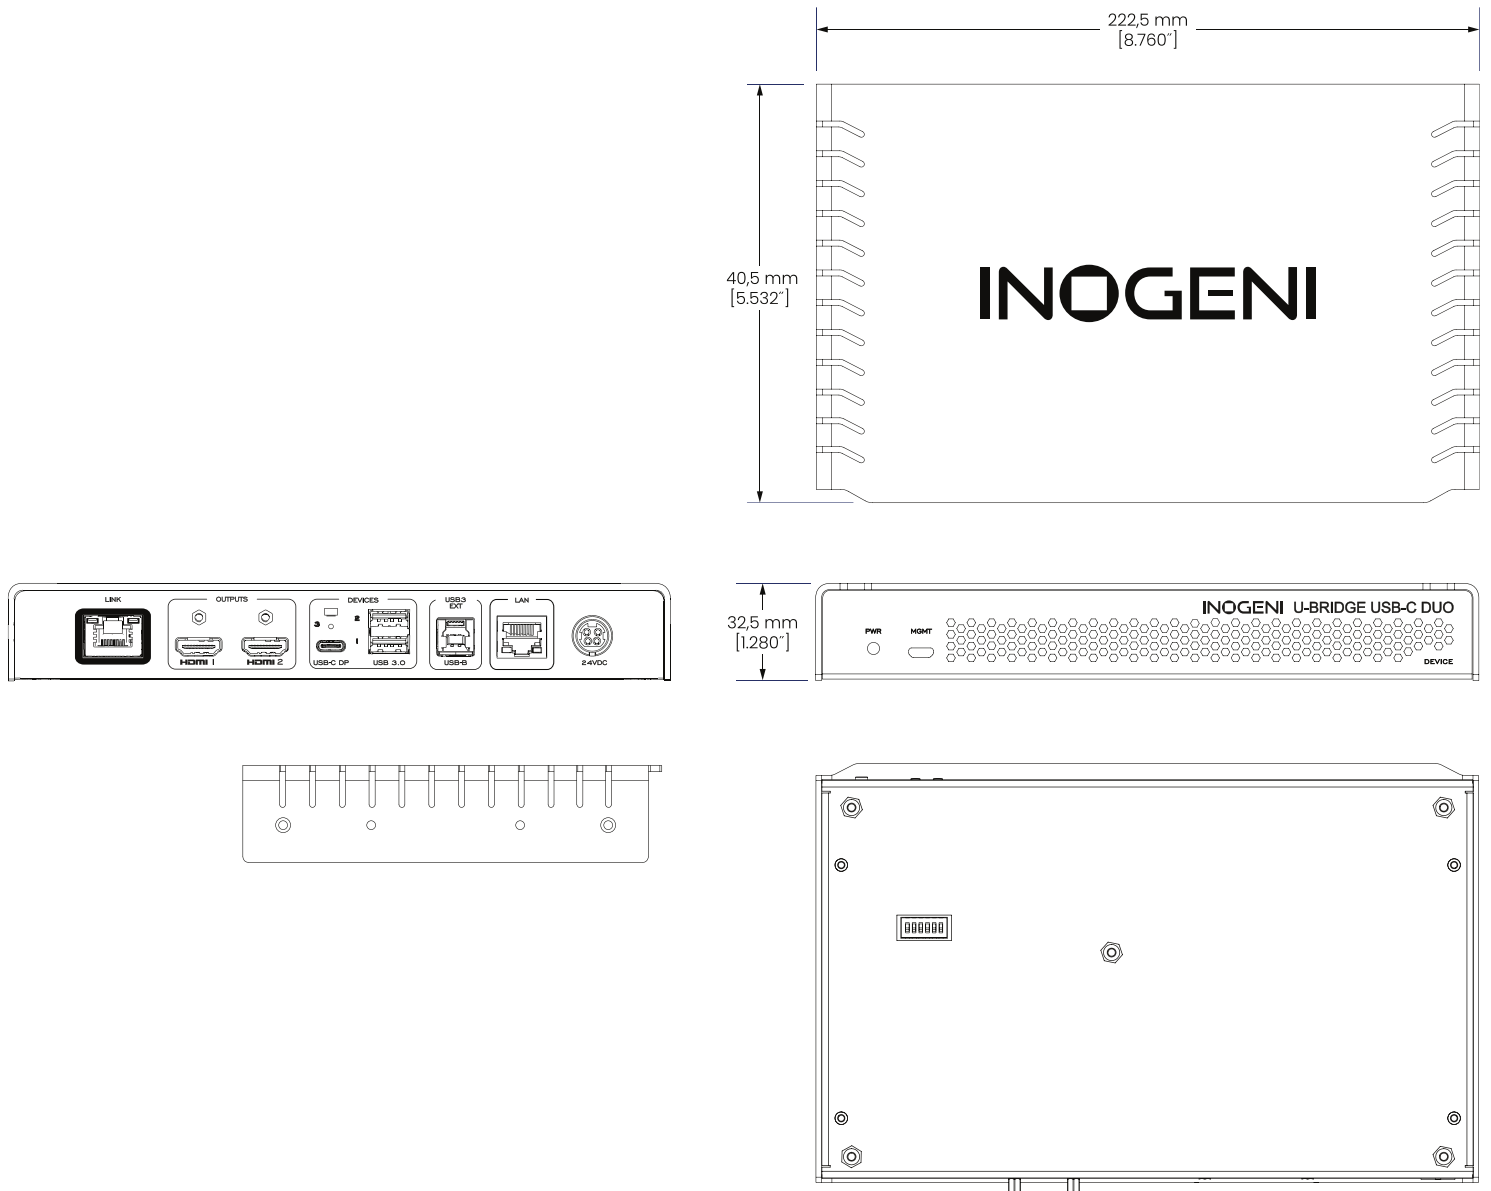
Bottom plate dimensions and holes positions of DEVICE hub – DUO variant
